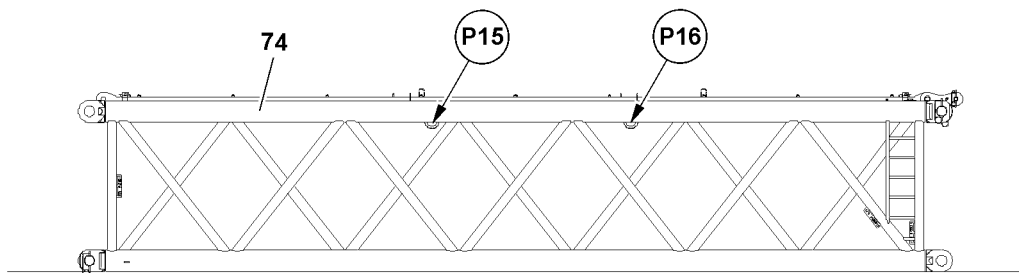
Fastening points LI-intermediate section 12 m 2621.8
